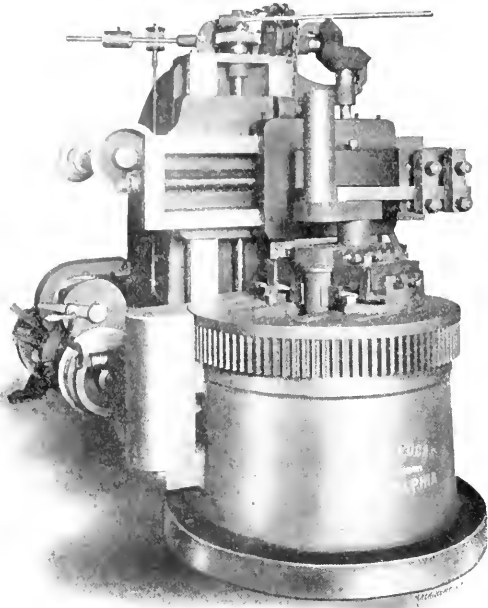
Espen-Lucas Machine for Finishing Crankshafts.
